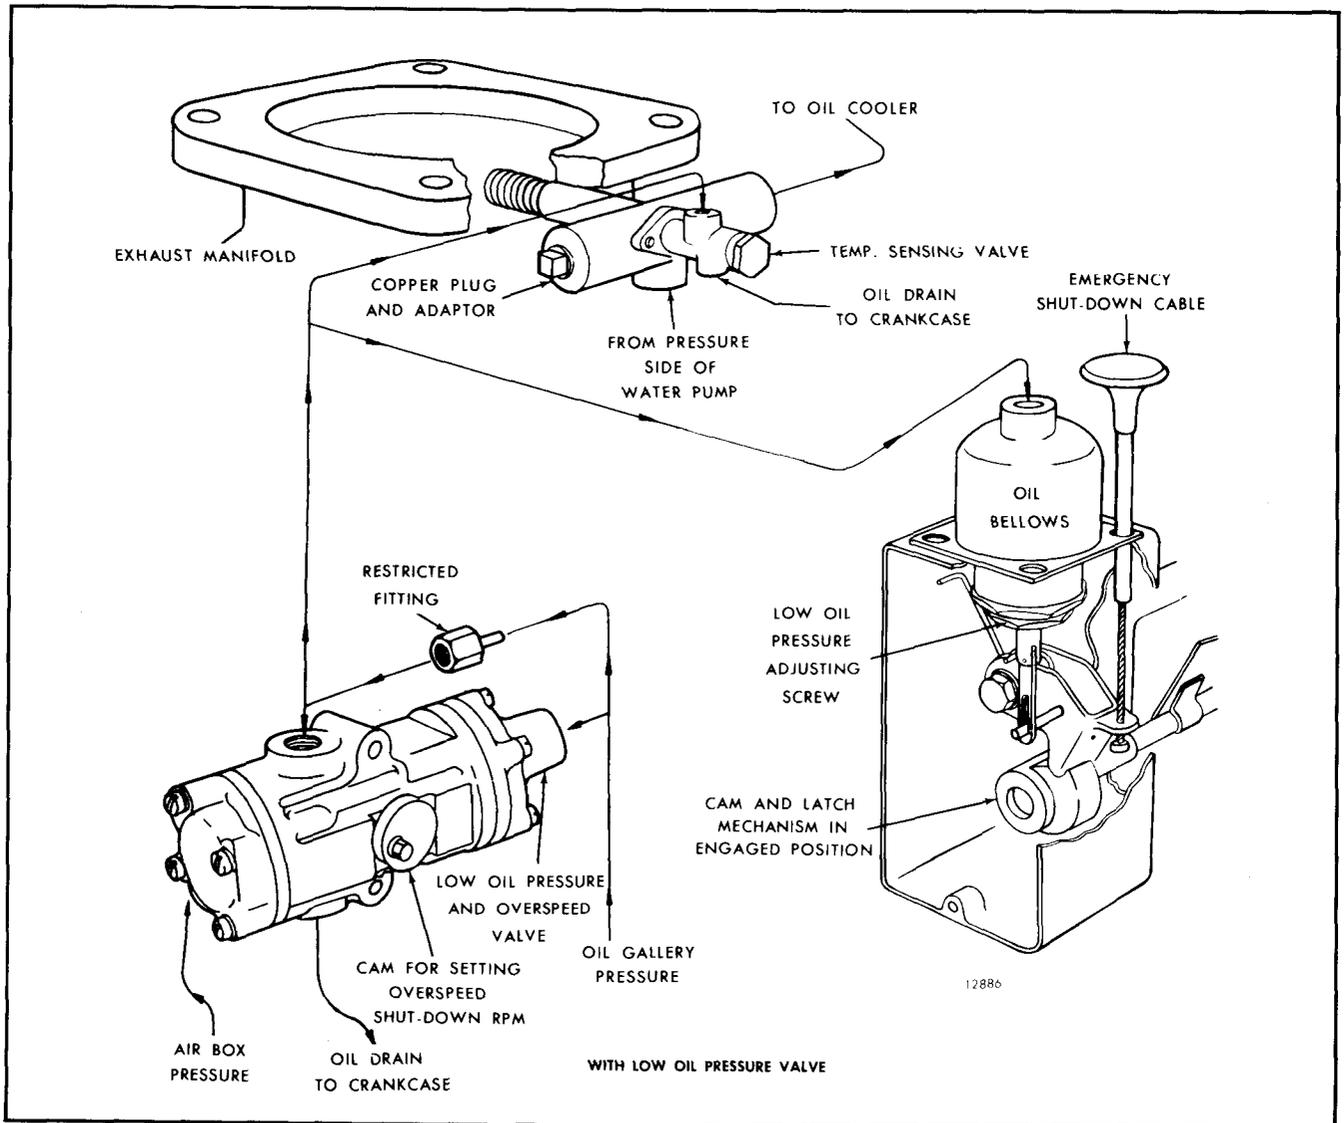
Schematic Drawing of Automatic Mechanical Shutdown System with Low Oil Pressure and Overspeed Valve
